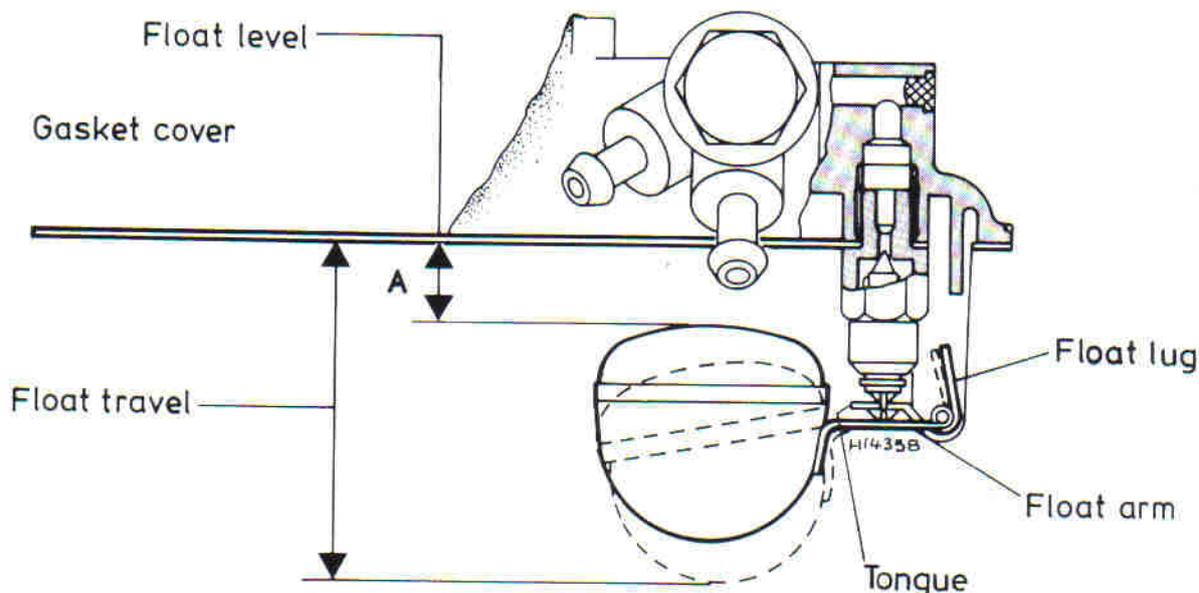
Float setting diagram for IPM 32 MGV carburettor (Sec 11)
